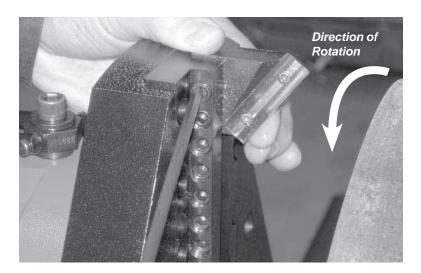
Insert the tool in the tool holder and tighten the set screws holding it. Make sure the cutting edge of the tool is toward the direction of rotation, as shown.
